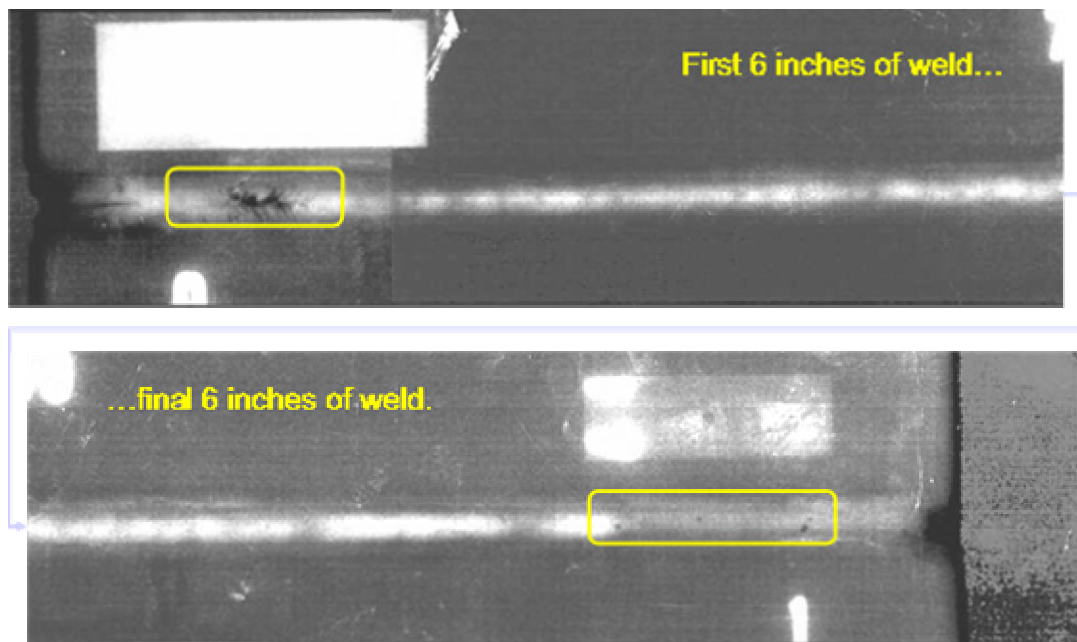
Radiographic testing of hybrid weld in 12.7 mm (0.5 inch) thick mild steel reveals small amount of porosity confined to regions near the beginning and end.
